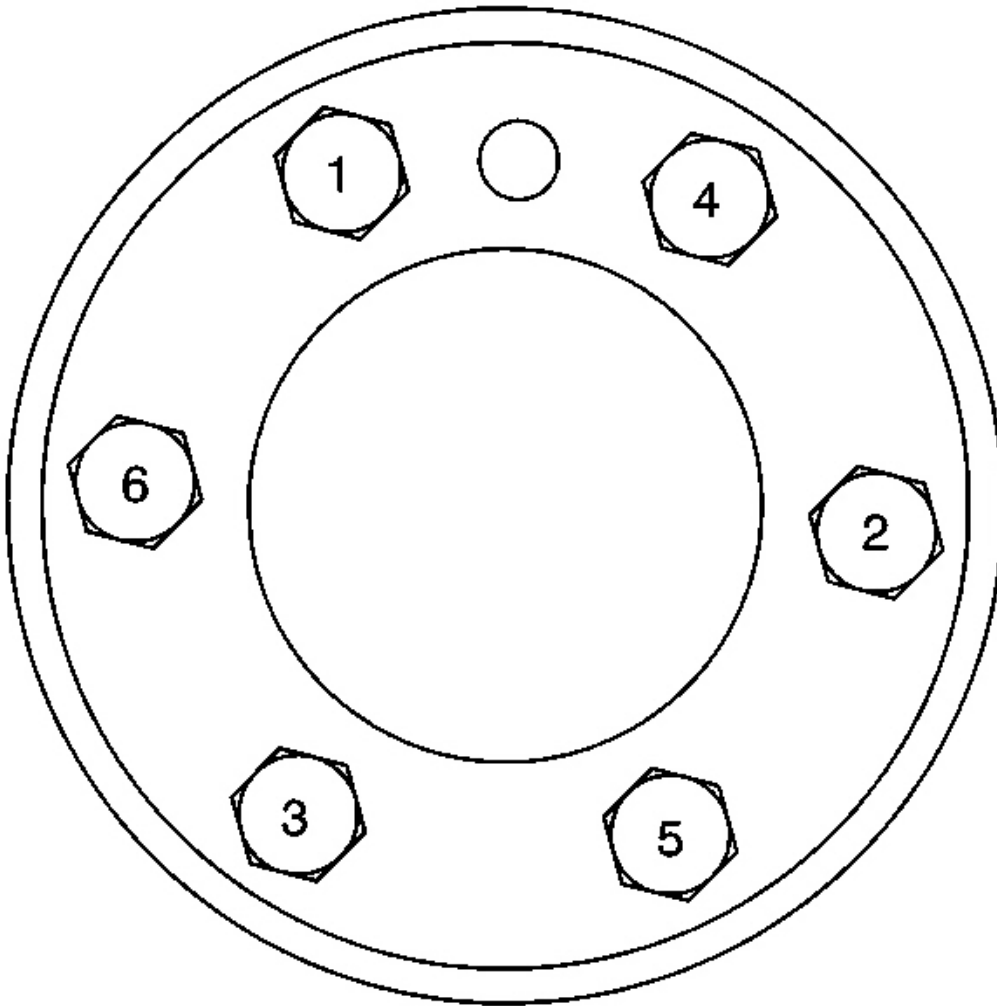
Identifying Flywheel Bolt Tightening Sequence
